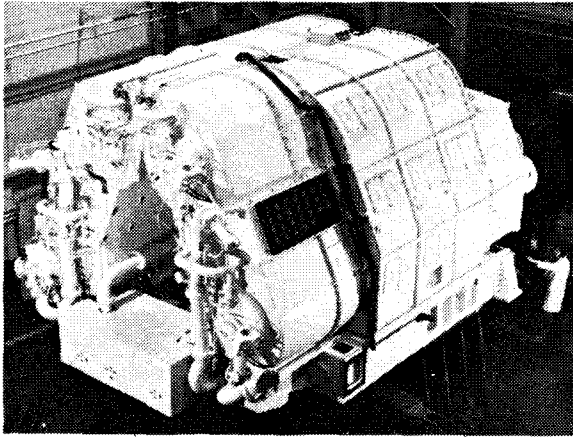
Reversing gear unit for A/S Cruiser (CAH)
